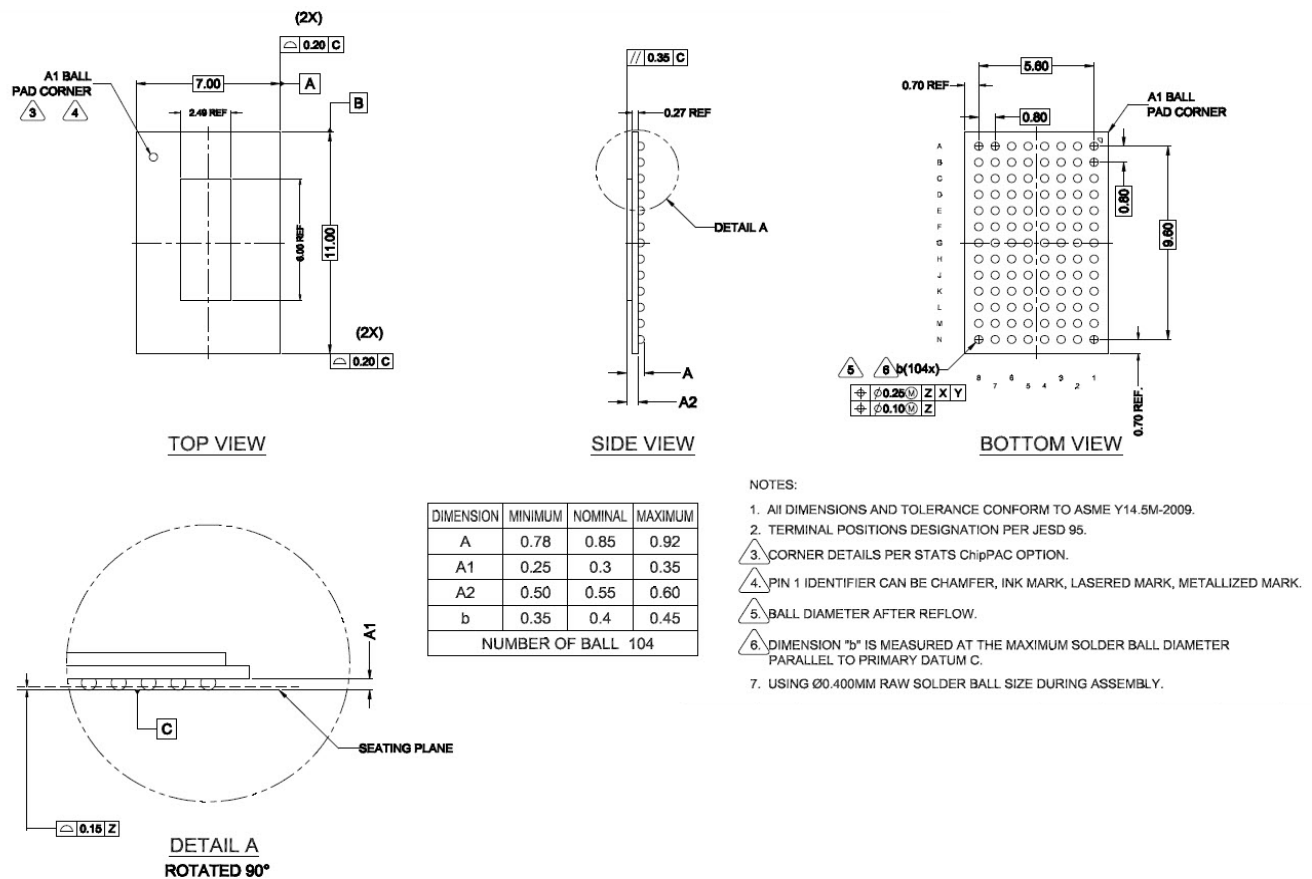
AQR113-AQR114-AQR115 Mechanical Drawing
